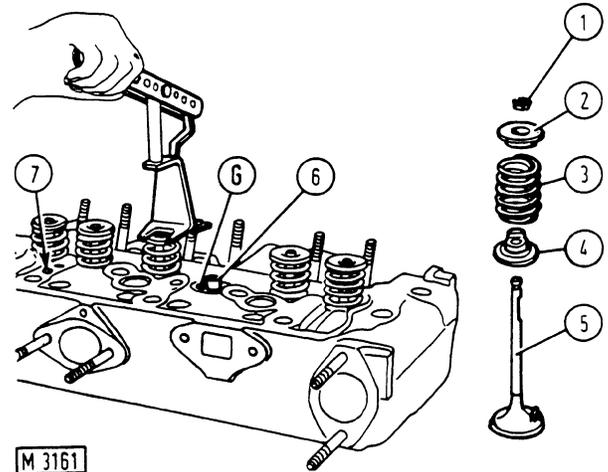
Dismantling (installing) valves and springs with tool 75291050.
